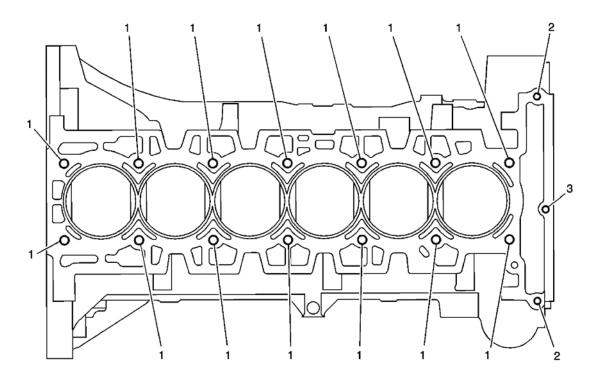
Engine Block Thread Repair - Top View Courtesy of GENERAL MOTORS CORP.
